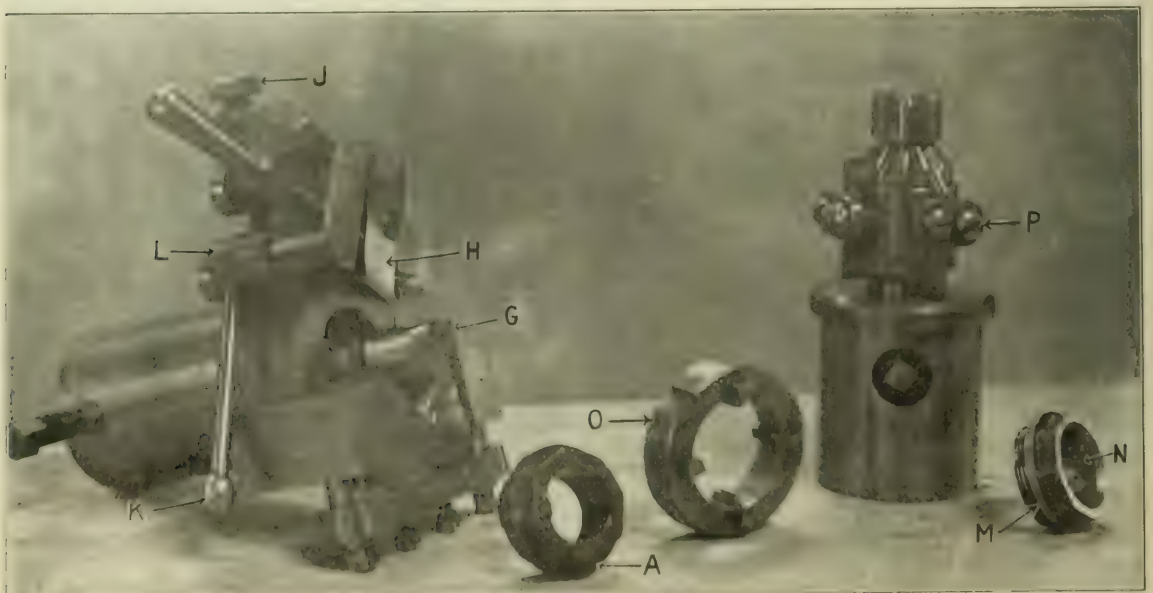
Tools for Machining Valve Seat for Air Pump.
